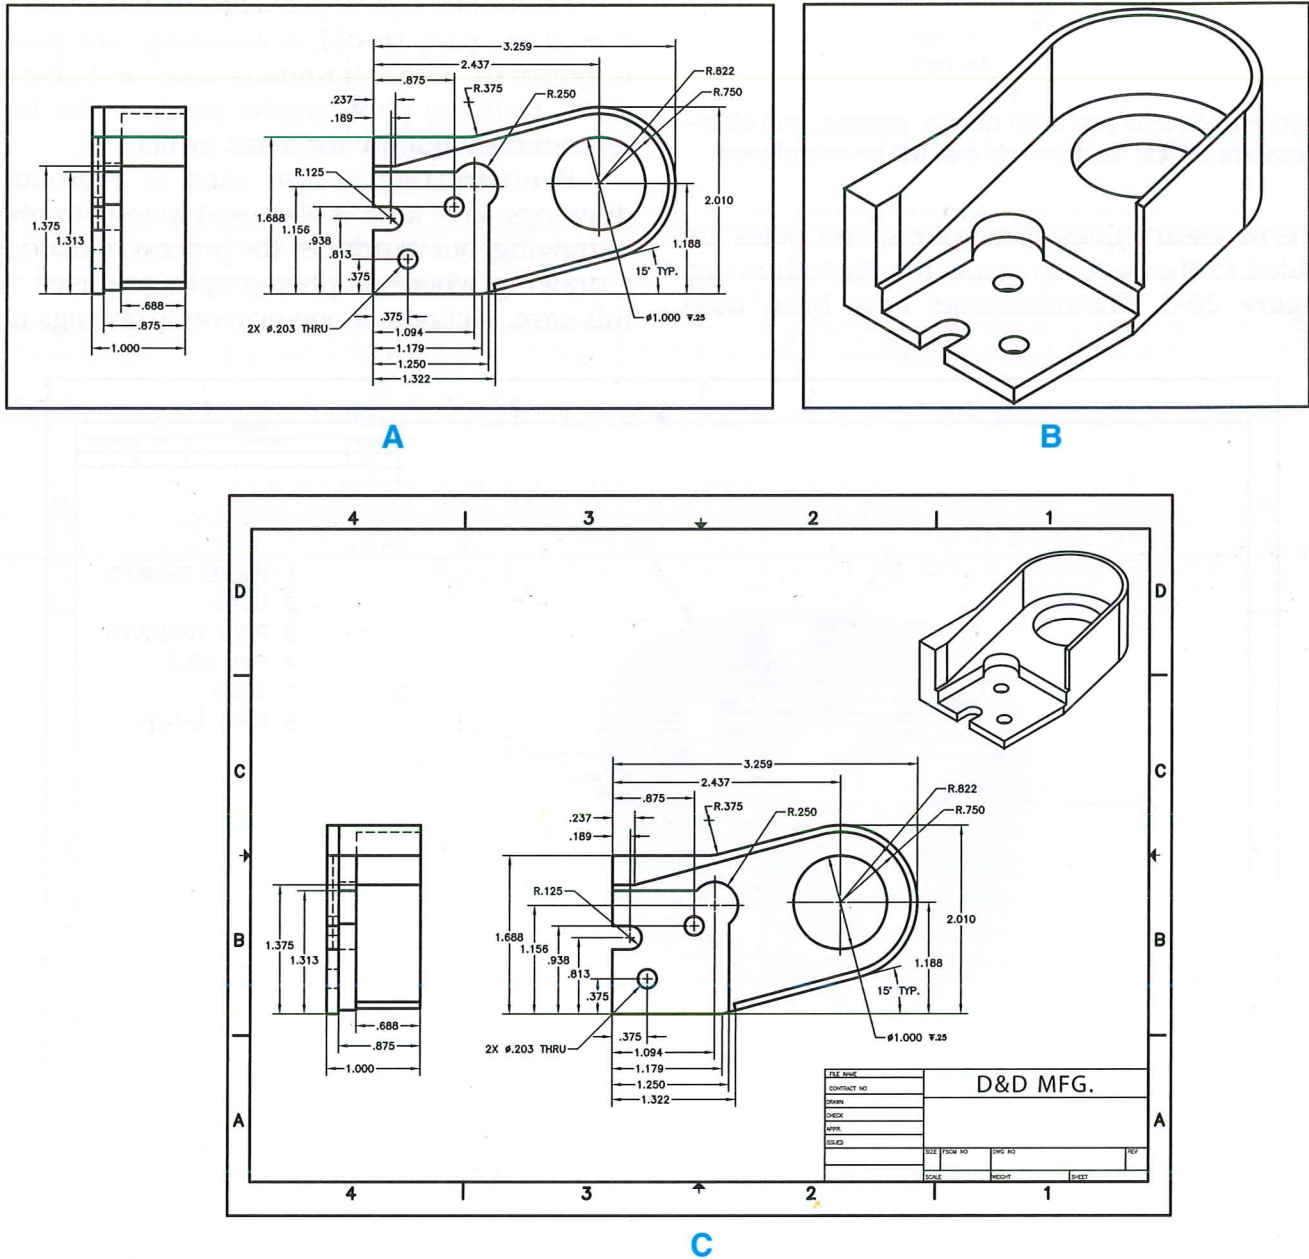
Scissors drafting takes parts of original drawings and splices other parts in for a “second original” drawing. A—An existing orthographic drawing of a part made up of front and side views. B—An isometric view of the part created as a separate drawing. C—The drawings are reproduced and “merged” onto a drawing sheet to create a “second original” drawing.
